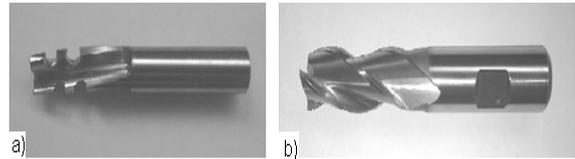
Tested milling cutters: a) with compensation edges; b) tool made by ZPS-FN
